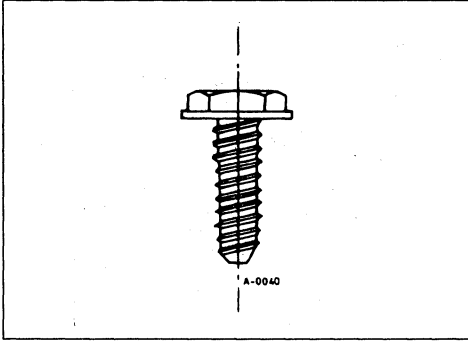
The Heatsink Tab may be deformed if a Washer or a Wide-headed Screw is not used.
